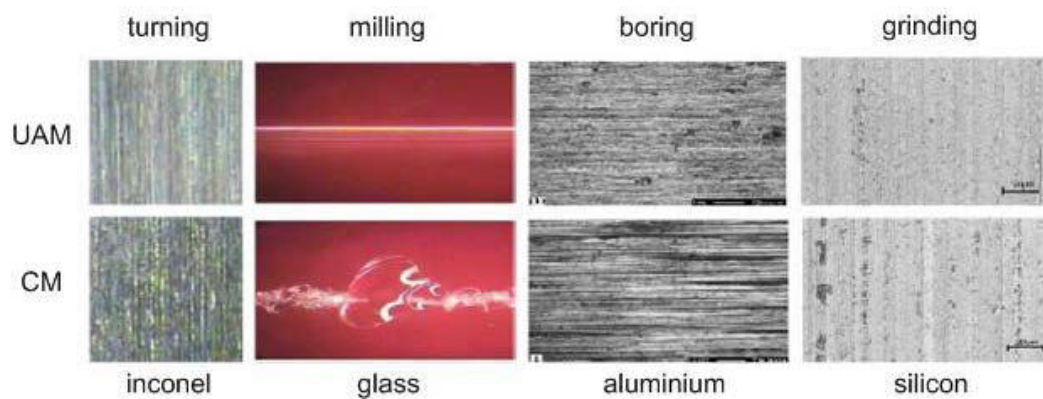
Comparison of Ultrasonically Assisted Machining (UAM) and Conventional Machining (CM)
